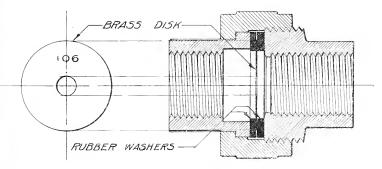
Sectional view of union in outlet pipe, with disk and washers in place.
